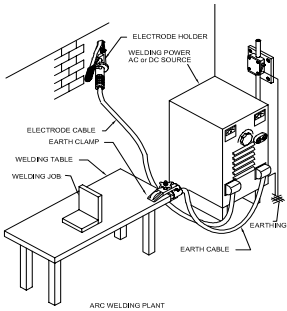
Welding Power Sources (Machine)
